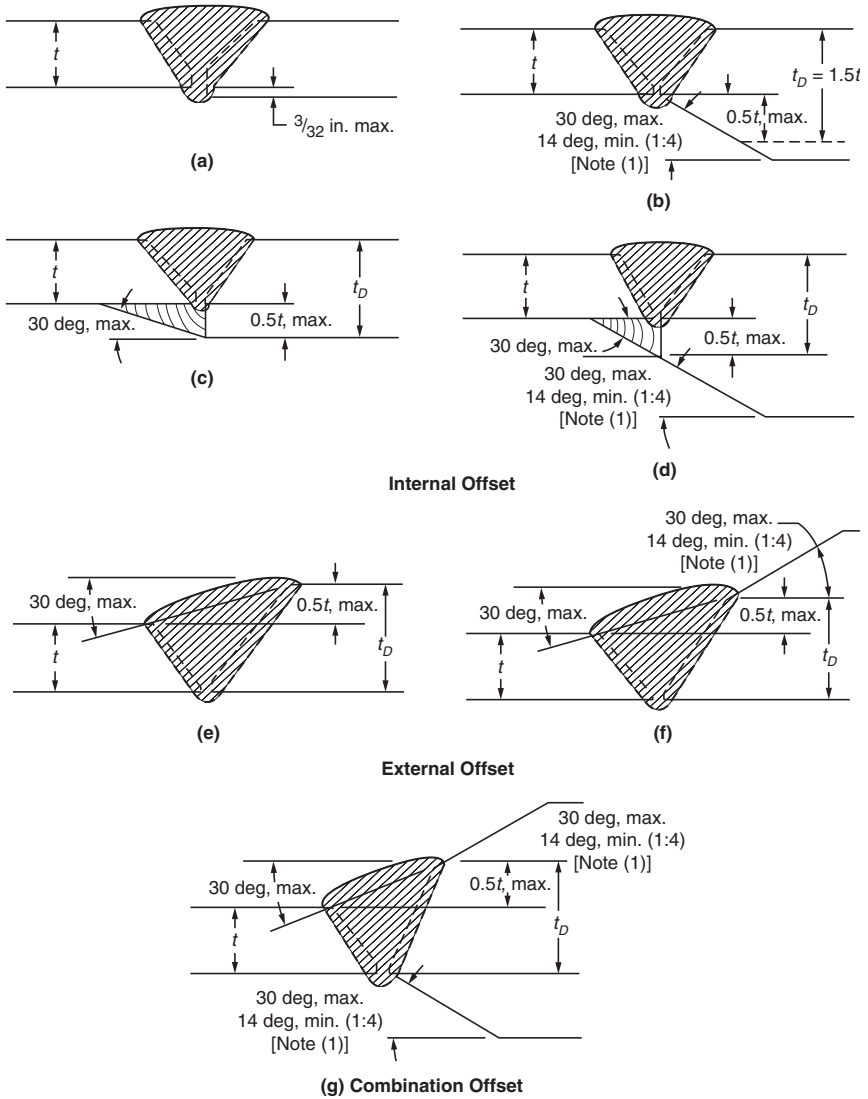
Some examples of weld preparations and types of welds that meet Code requirements. In any code others may be acceptable.
